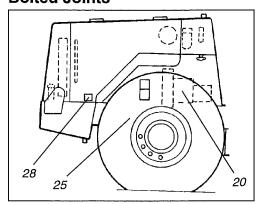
Right side of machine 20 Hydraulic pumps 25 Rear axle 28 Engine suspension
